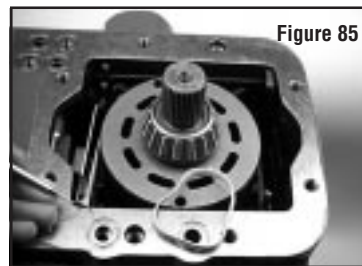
Remove the bearing puller and two rubber bands from the swashplate assembly. (see Figure 85)
